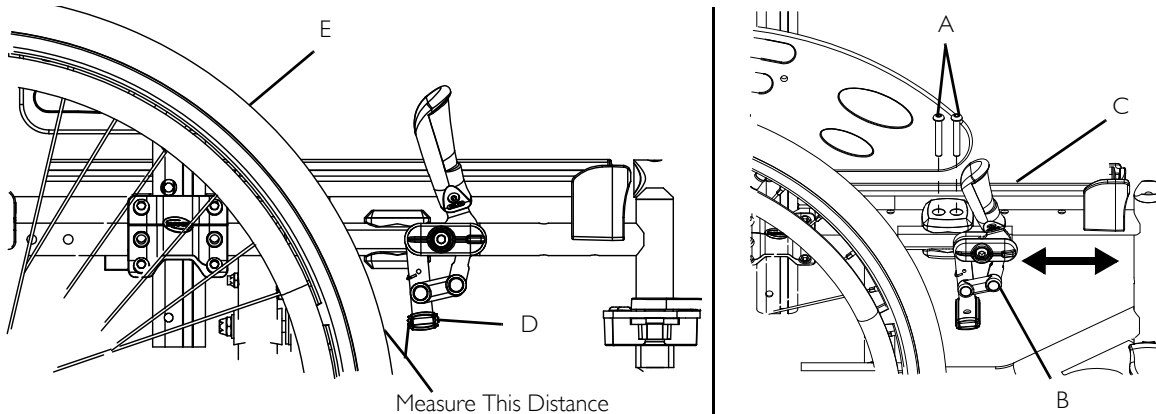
Adjusting Wheel Locks- Adjusting Wheel Lock Tension.
